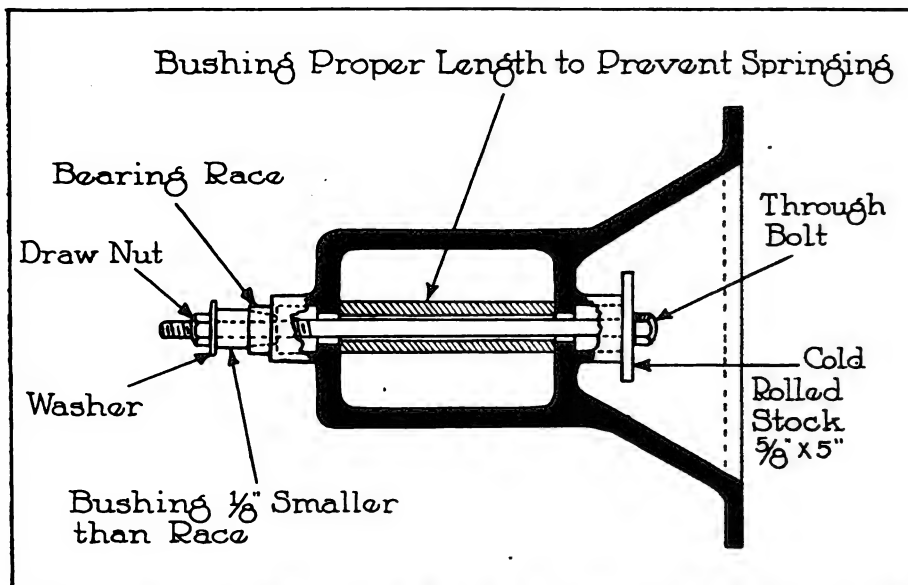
Light and Fragile Castings Must Be Braced to Prevent Breaking or Springing When Bearing Race Is Being Drawn Properly to Seating Position.
